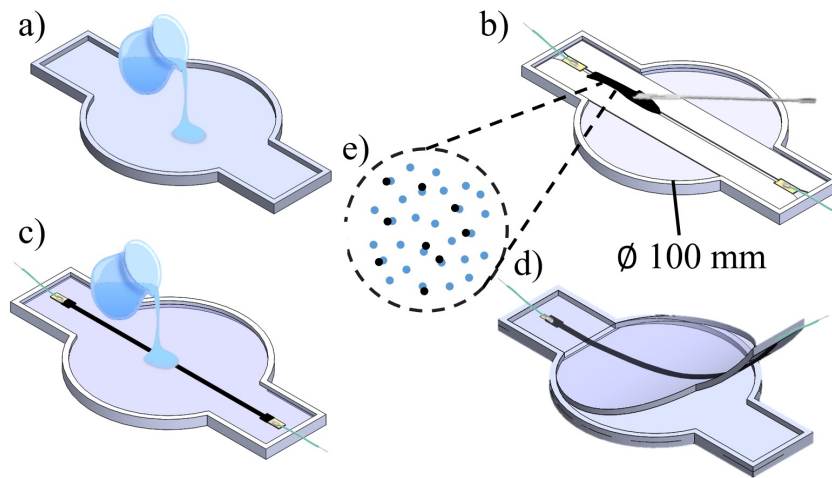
Fabrication of a single sensor: a) 15 g of Ecoflex™ 00-10 mixture is poured into a mold to form a layer of 1 mm thickness. b) The cured Ecoflex is covered with a mask and the Carbon Black composite is spread across the channel. c) The mask is peeled off leaving a conductive sensor channel and a second layer of 10 g of Ecoflex™ 00-10 mixture is poured. d) The membrane is slowly peeled from the mold. e) The carbon composite is composed of a 1:6 mass ratio of Carbon Black powder to Ecoflex™ 00-30.
